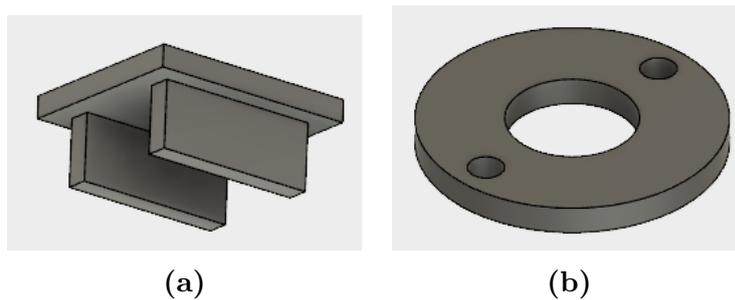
Actuator covers: (a) Actuator cover attached on top part of the base shield; (b) Actuator cover attached on the bottom part of the base shield.
